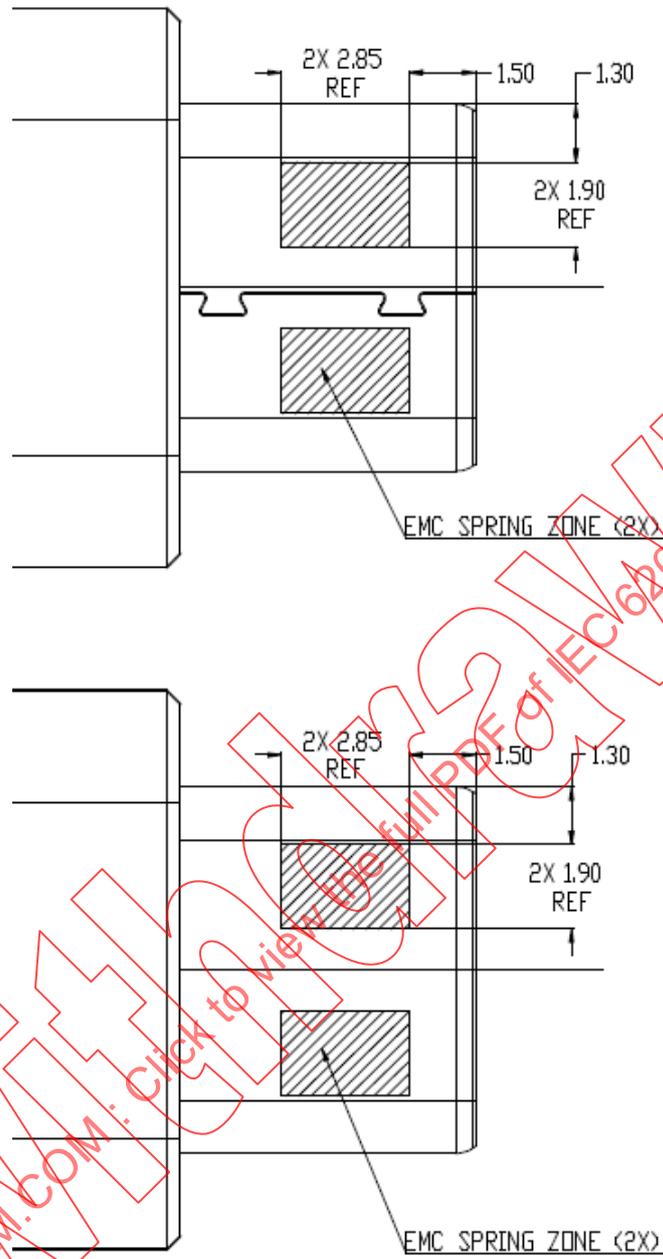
Reference Design USB Type-C Plug External EMC Spring Contact Zones
